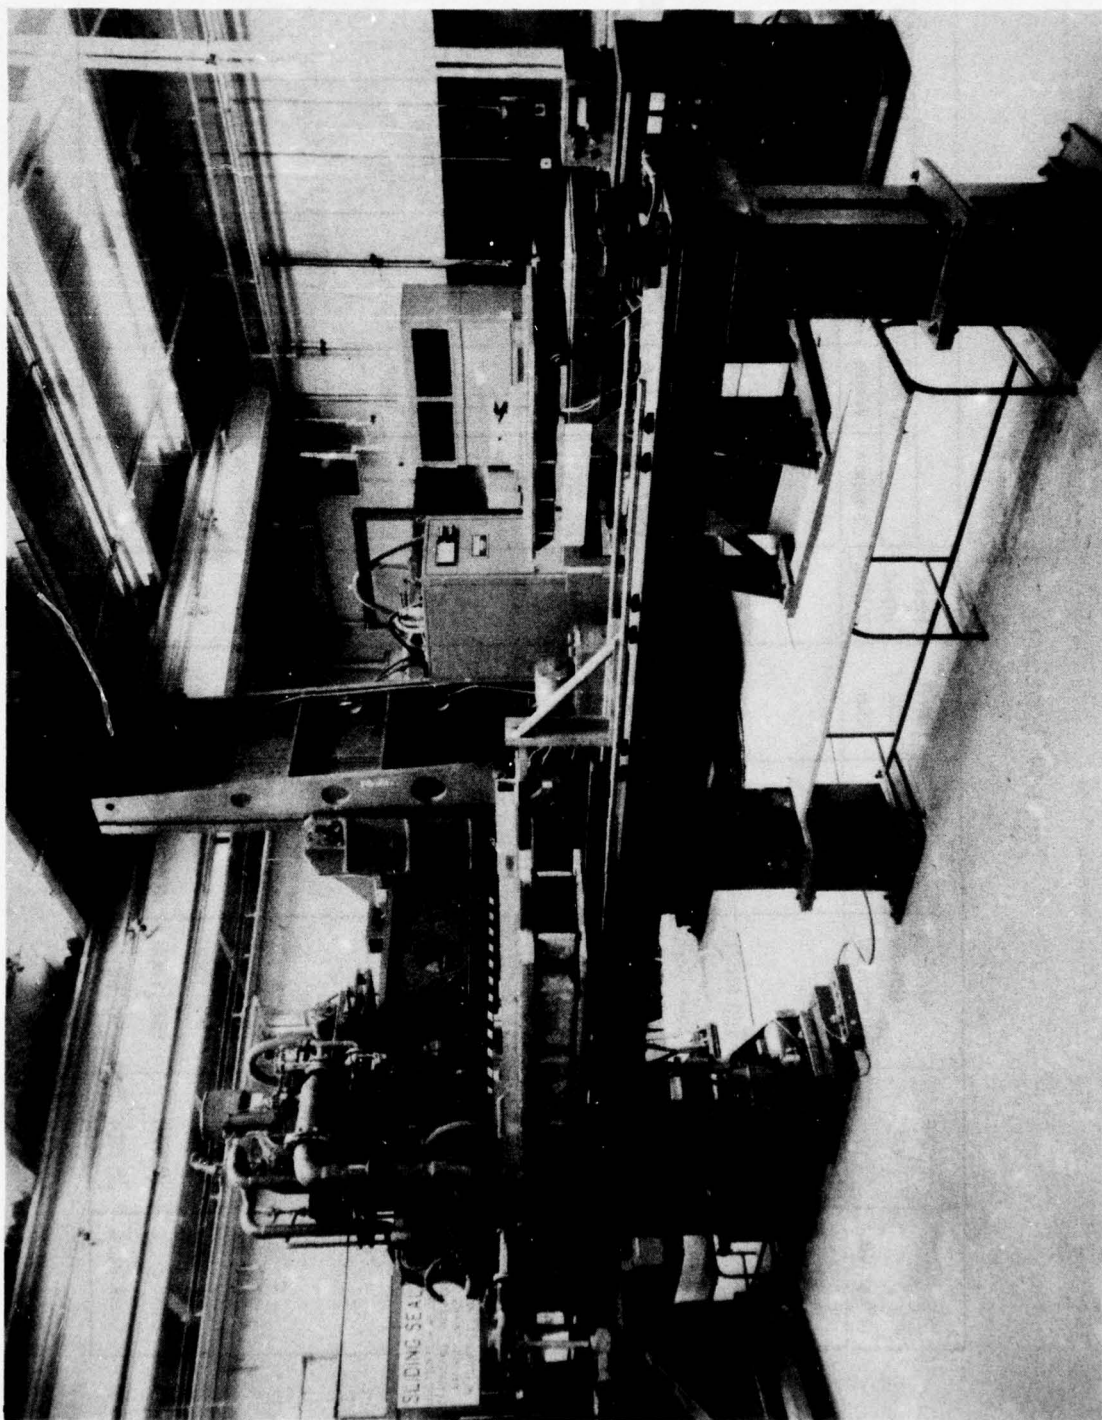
SSEB/Slot Weld Set Up - Vacuum Box
